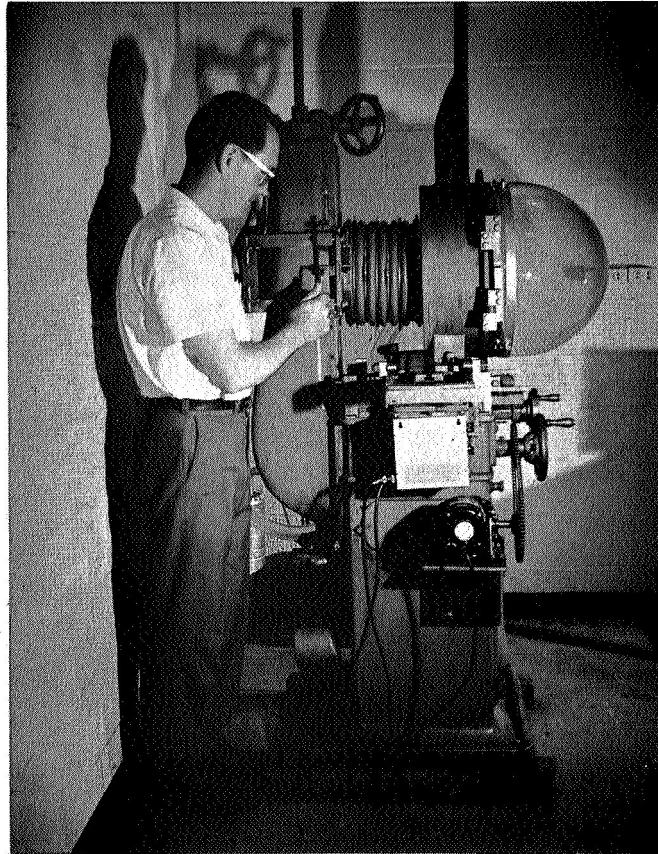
SIDE VIEW OF VACUUM GRINDING SYSTEM
